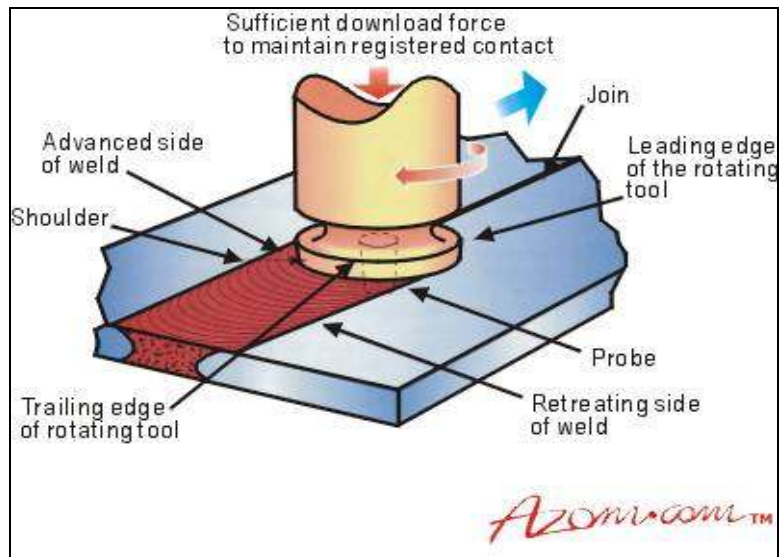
1 Schematic of friction stir welding (FSW)
